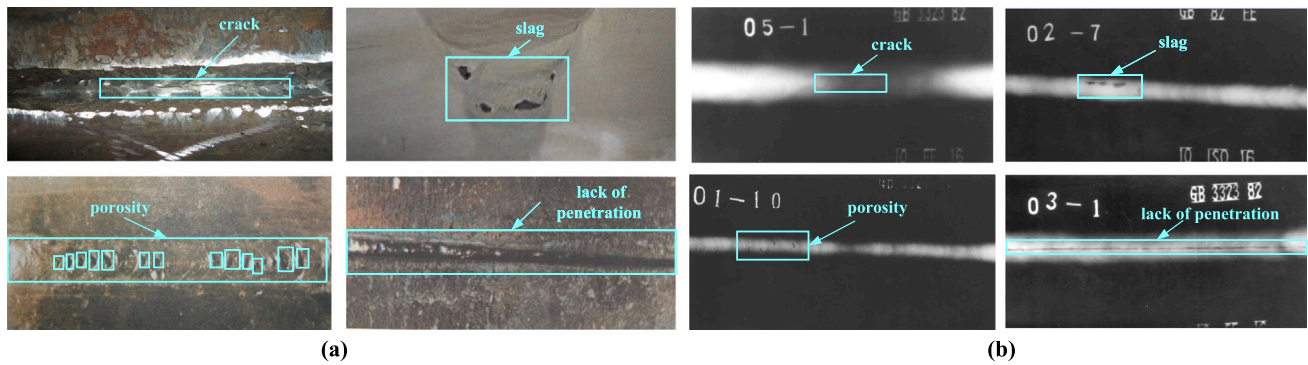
Illustration of weld defects. (a) Physical images of weld defects. (b) X-ray images of weld defects.
